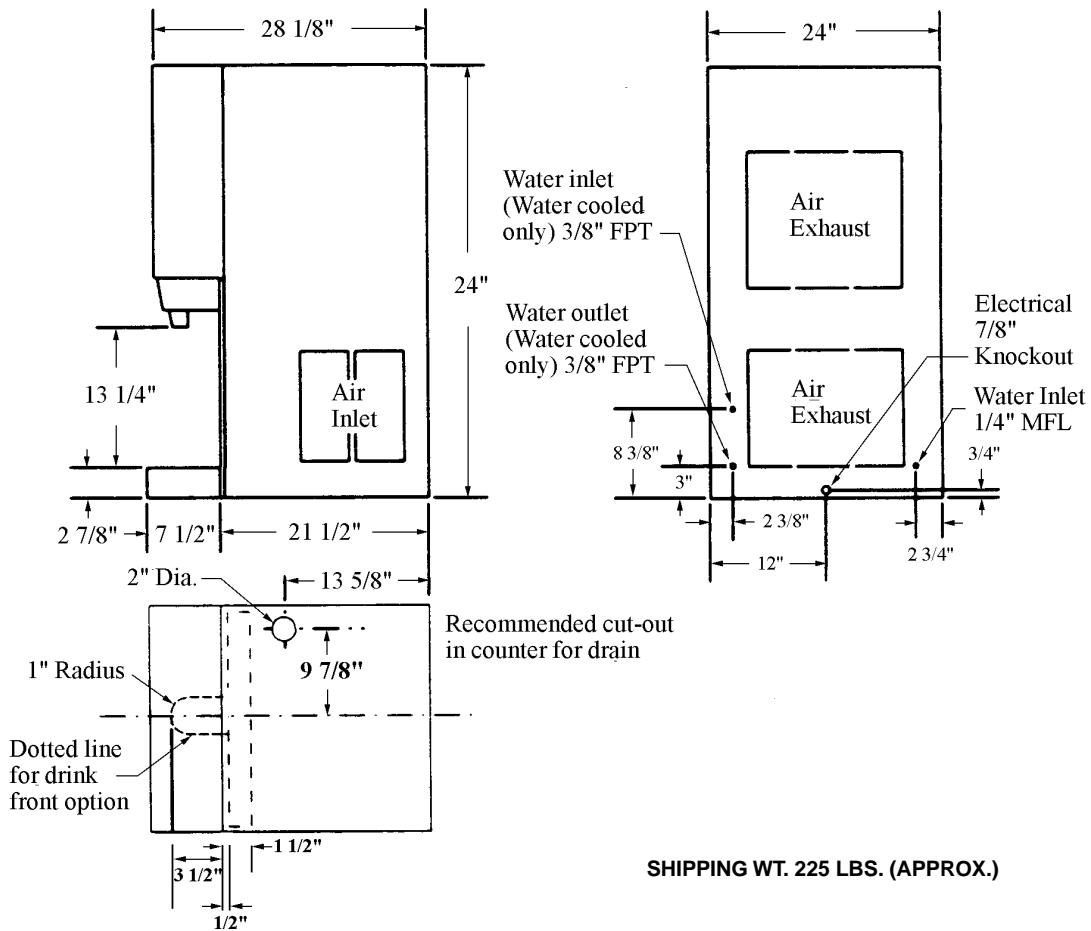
DIMENSION DRAWINGS (90 LBS.) IMD600-90
